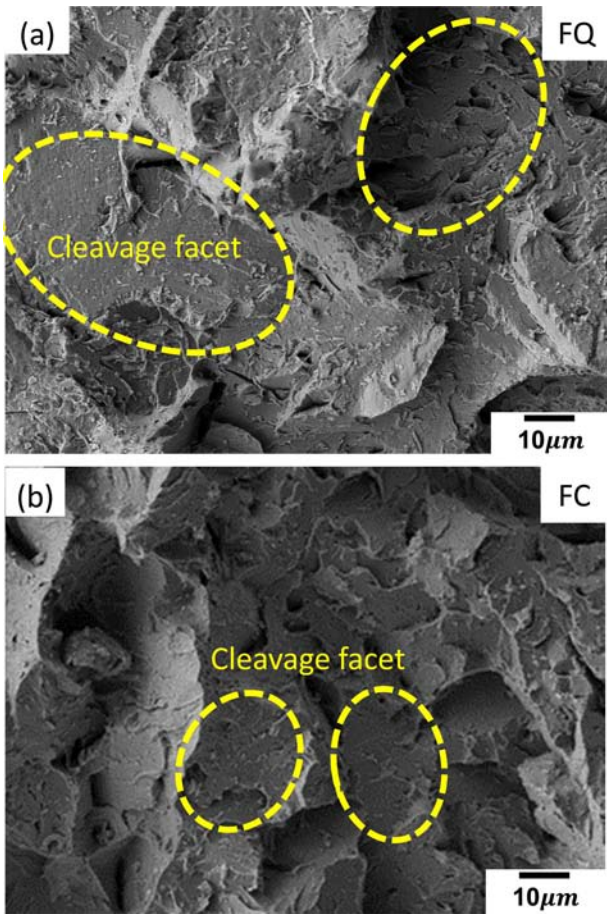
SEM(scanning electron microscope) fractographs of the fractured Charpy impact tests at -60 °C for the FCAW specimens.
